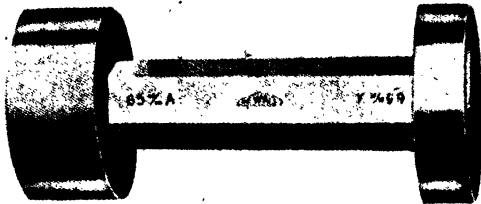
MEDIUM-SIZE PLUG GAUGE
